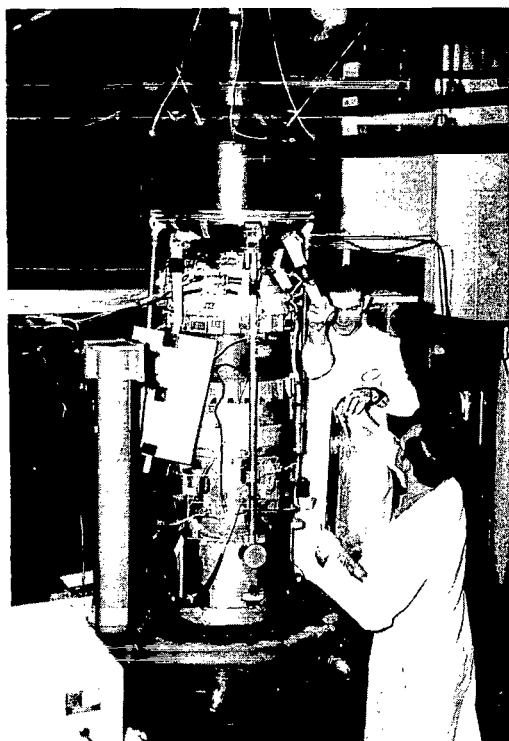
Installing solar paddle prior to thrust axis test of prototype unit on tall fixture.
